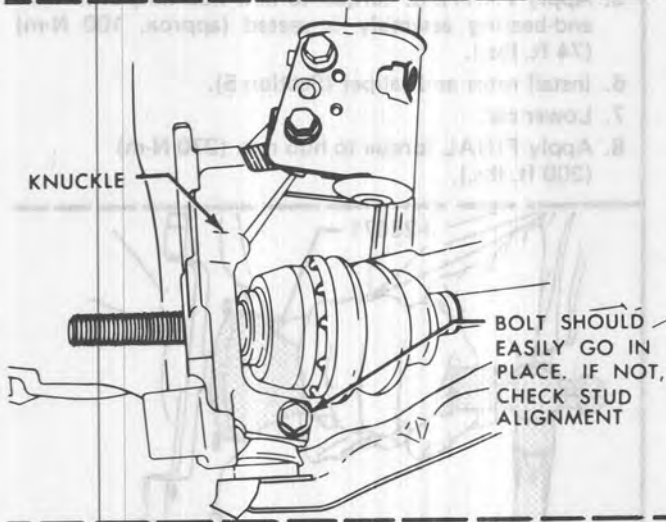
D-9 Remove/Install Rear Wheel Bearing
